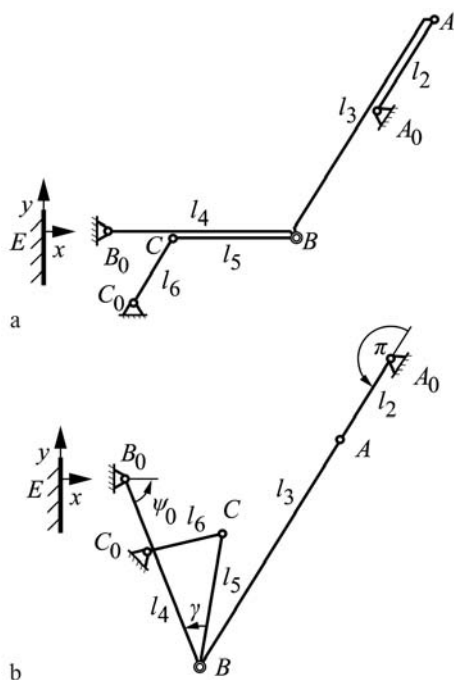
Test stand mechanism design in initial position (a) and final position (b)
